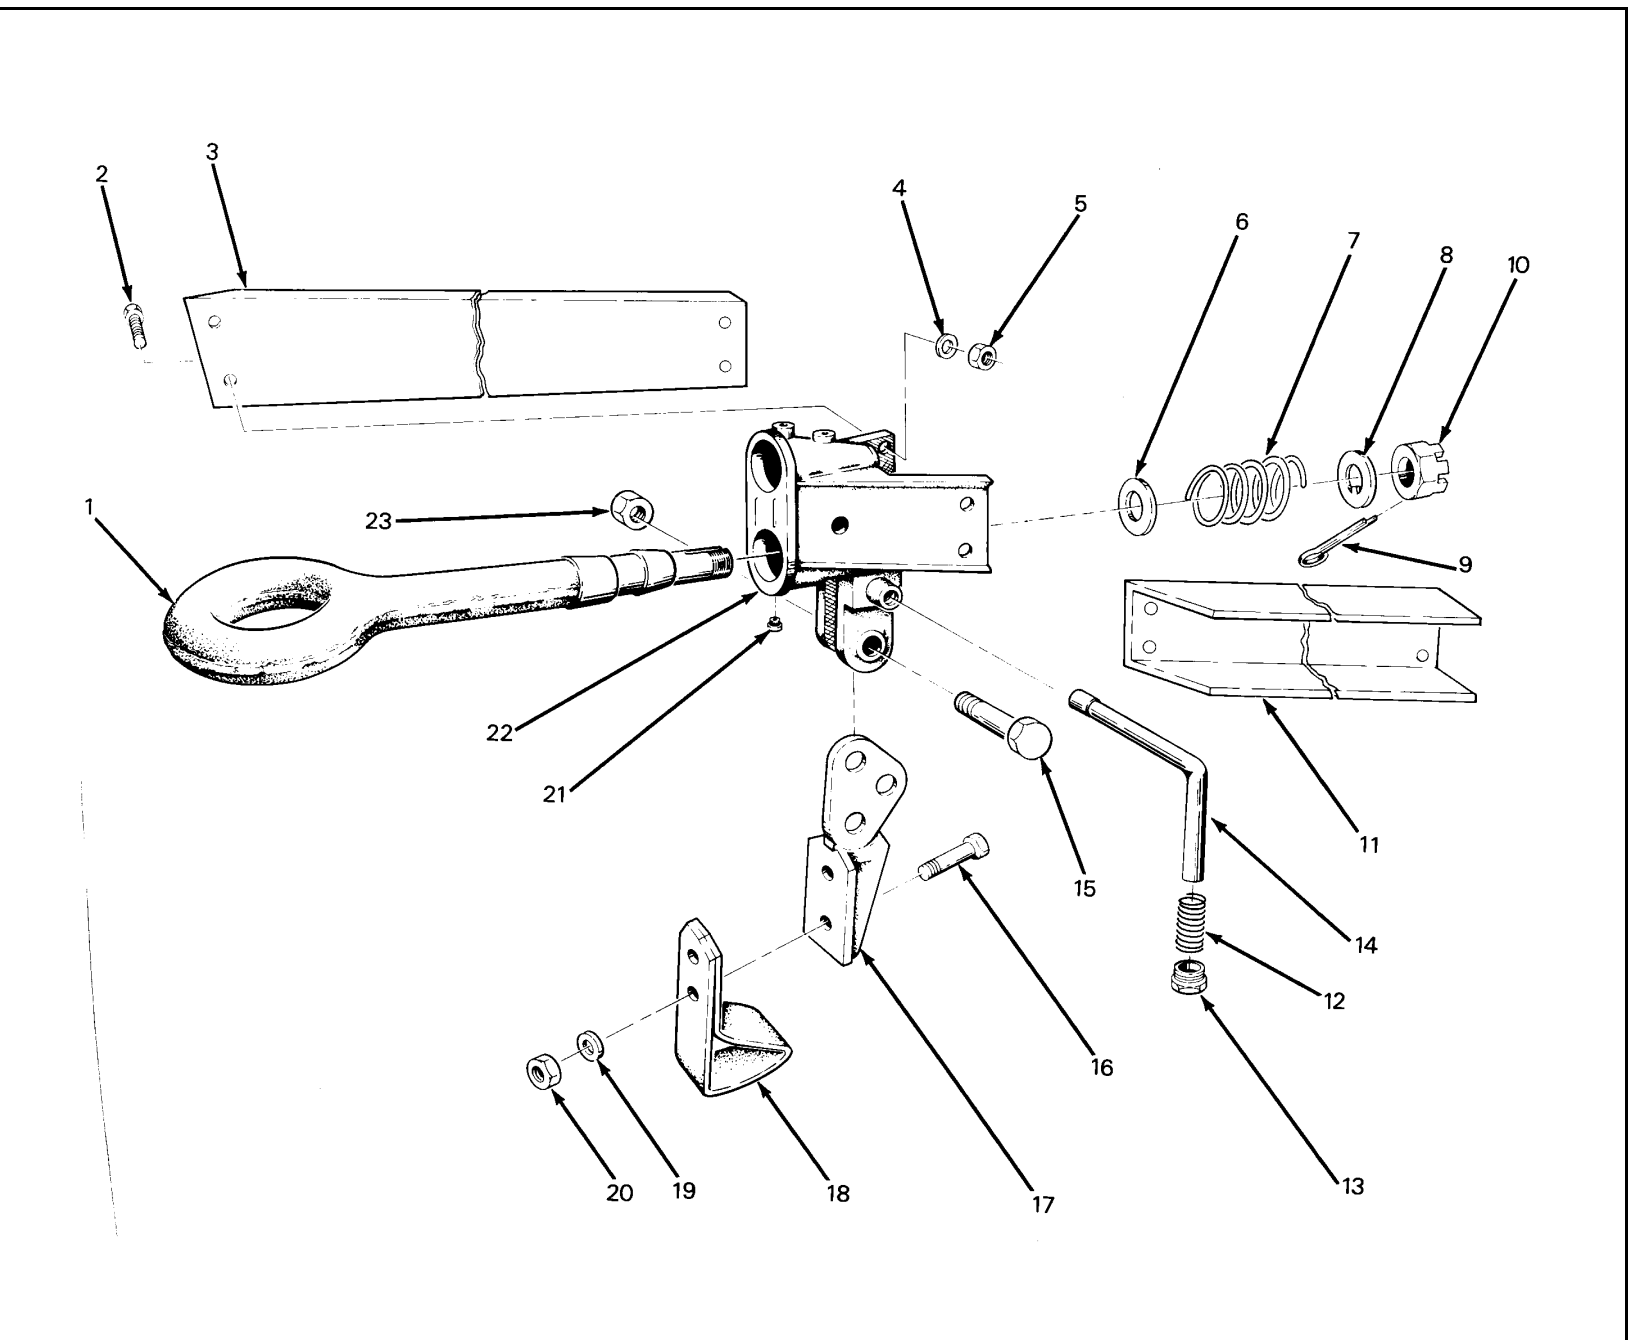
(Sheet 2 of 2) Drawbar Bracket Assembly
